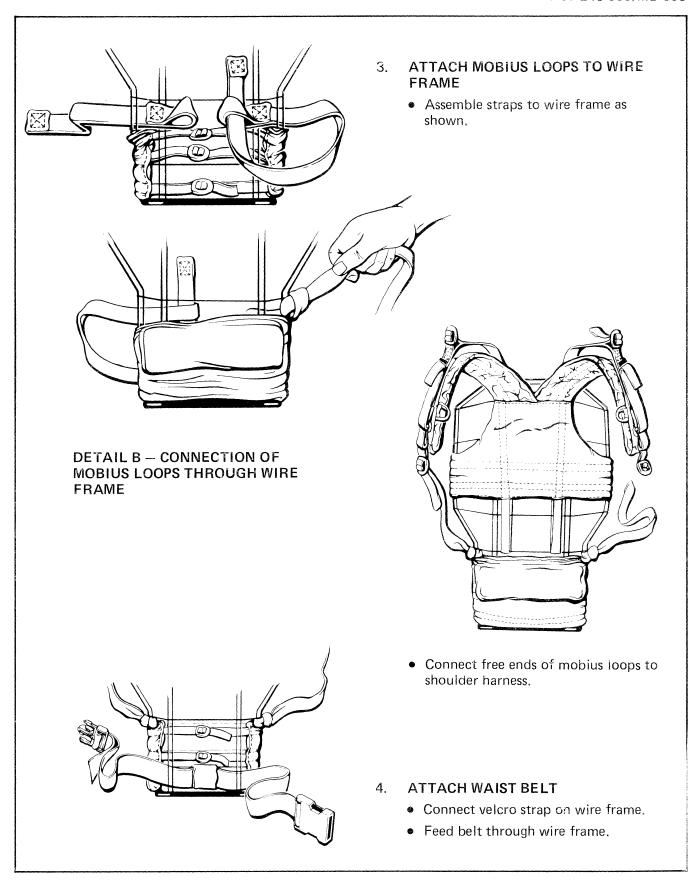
(Sheet 3 of 5) Large Field Pack/Frame — Assembly Steps
